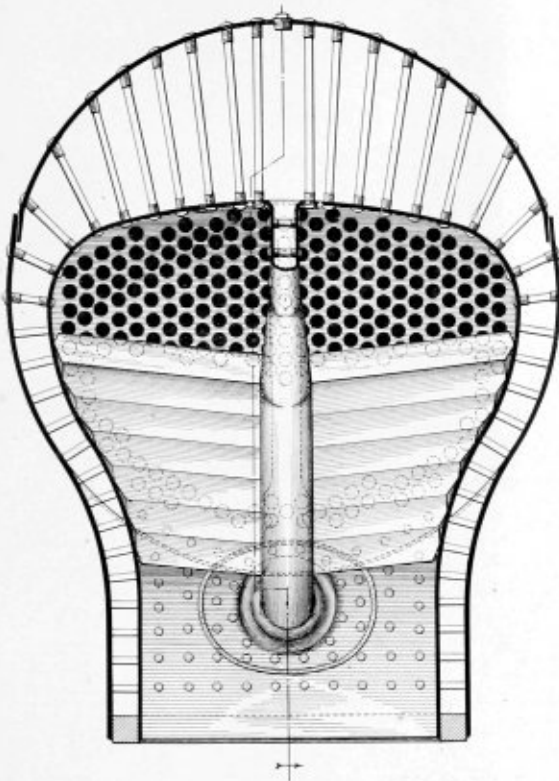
Single Syphon Applied to Narrow Firebox, Forming Substantial Arch Support
